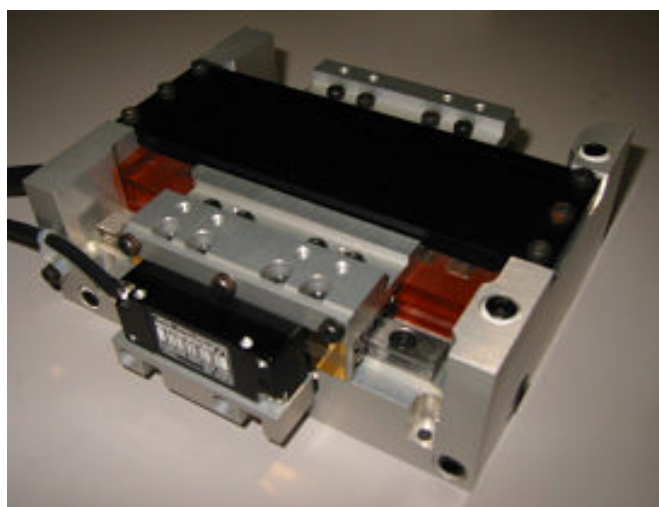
Exterior photos showed the double gap MC type liner motor
